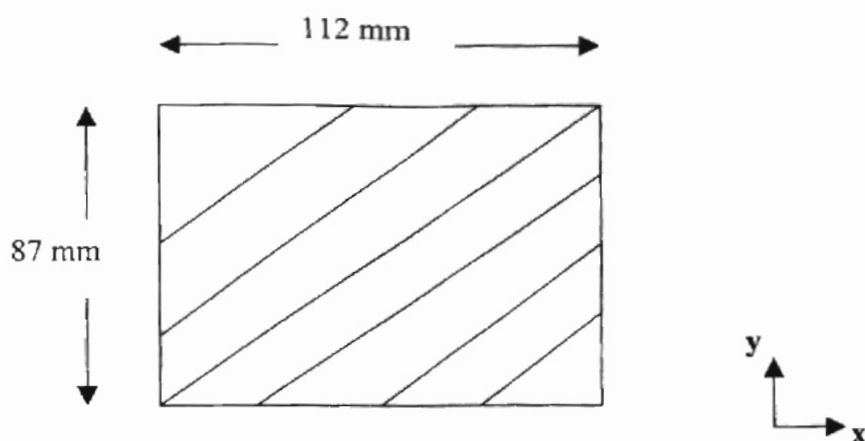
Sheet dimensions for the geometry shown in Figure 4-48
